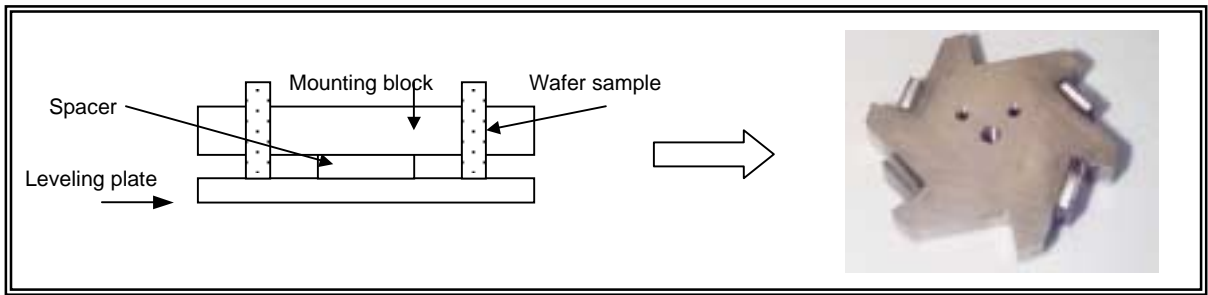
Illustration of the mounting process used for attaching the wafer pieces to the mounting block. The mounting block is placed onto a spacer and leveling plate all on the surface of the hot plate to facilitate even mounting of the wafer pieces. Wax is applied to the mounting block and the assembly is allowed to cool.
